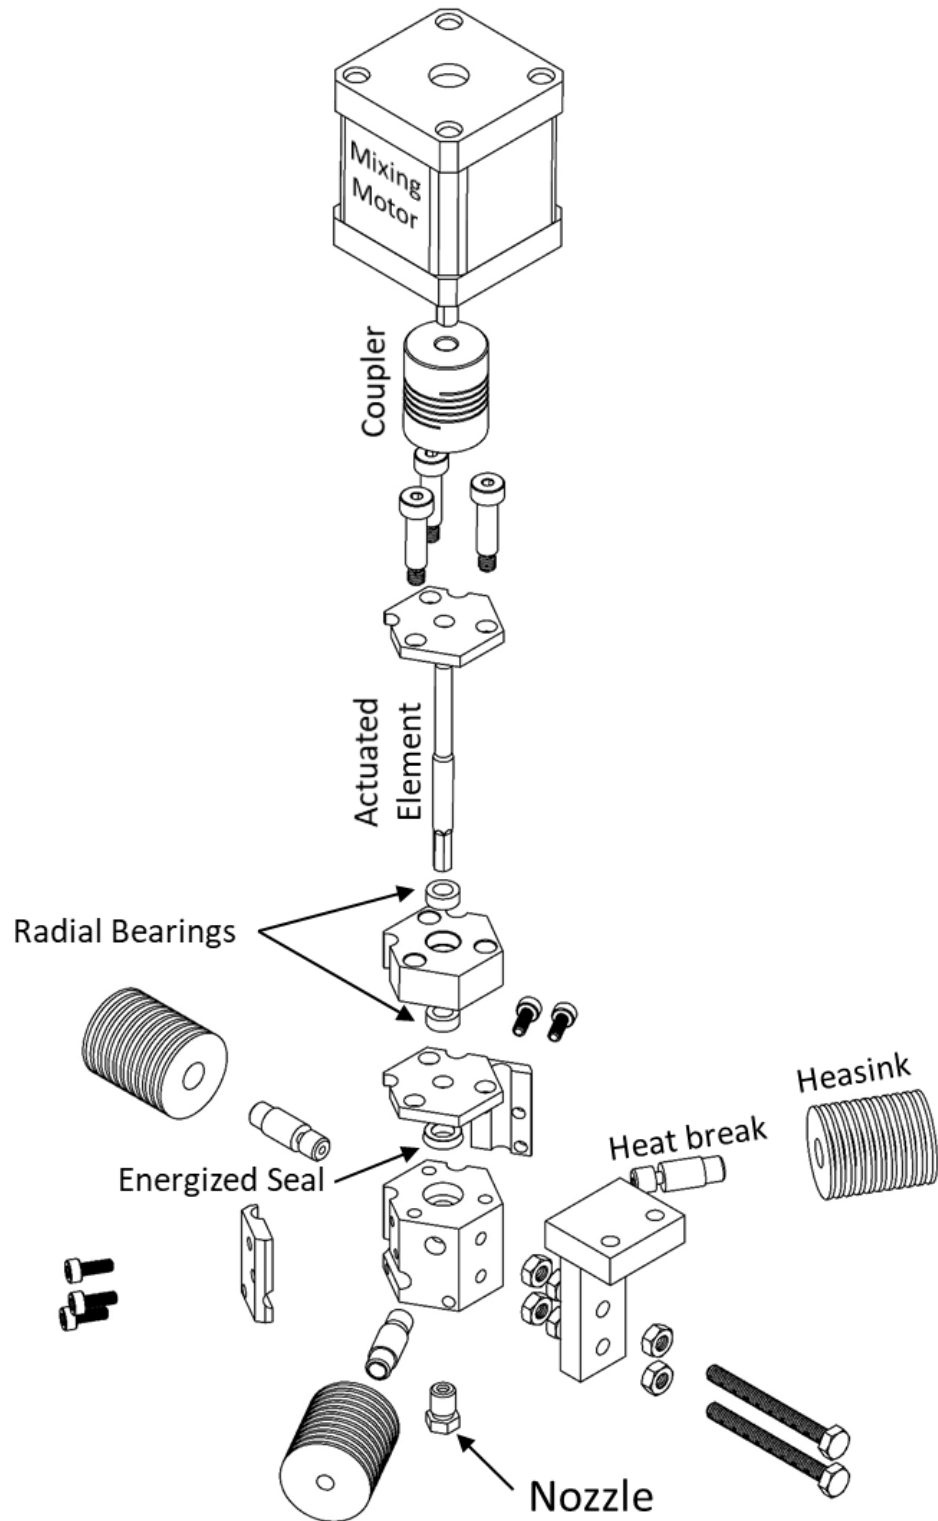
Exploded view of revised custom hotend. Energized seal seats into the gland at the top of the heated chamber.
